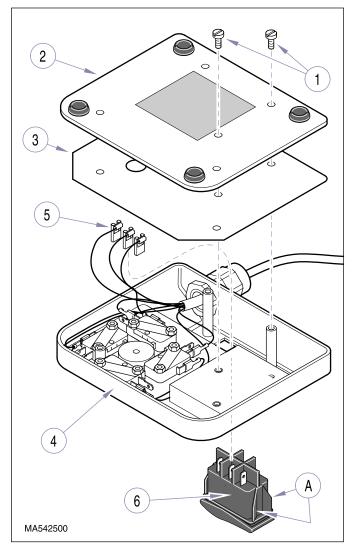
Auto Exit / Operate Switch Removal / Installation
